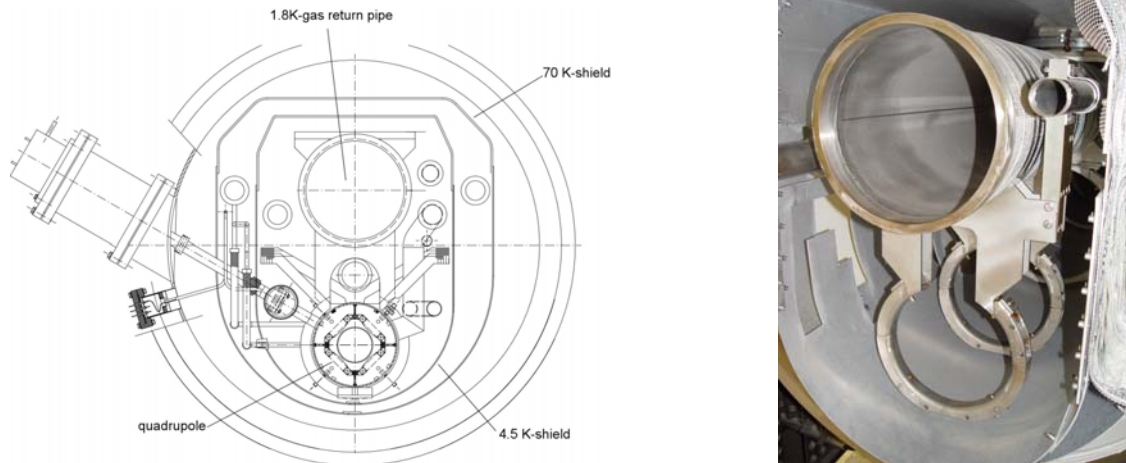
Cross-section of a Type II cryomodule [2]. On the right, a picture of the quadrupole support structure is shown.
